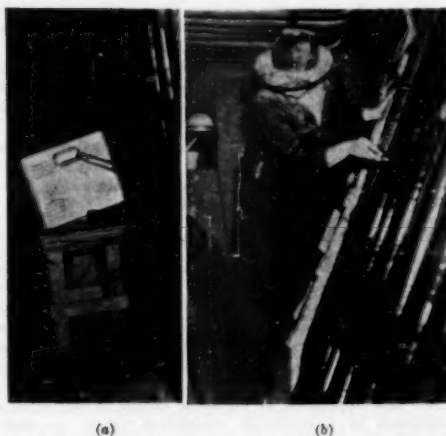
ULTRASONIC INSPECTION OF OUTLET SECTION OF CONVECTION SUPERHEATER
